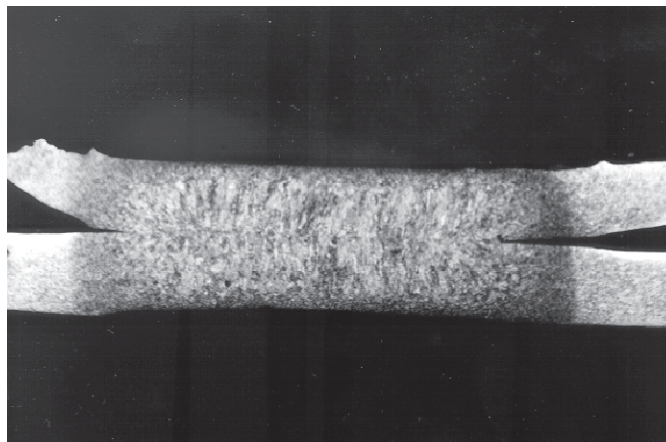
Microscope view of a spot weld between two sheet metal parts [11]
